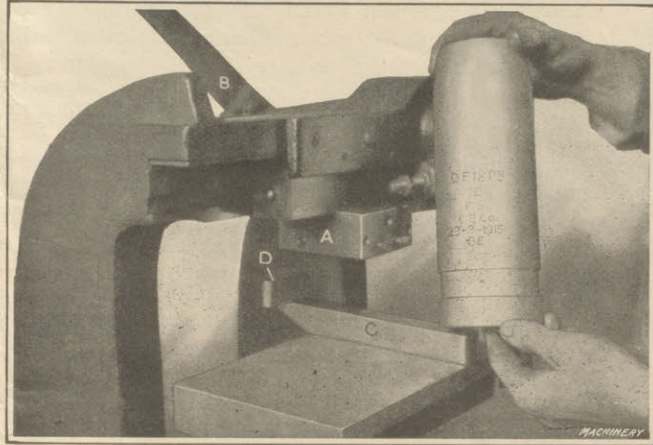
Dwight-Slate Hand-operated Marking Machine for Shrapnel Shells
